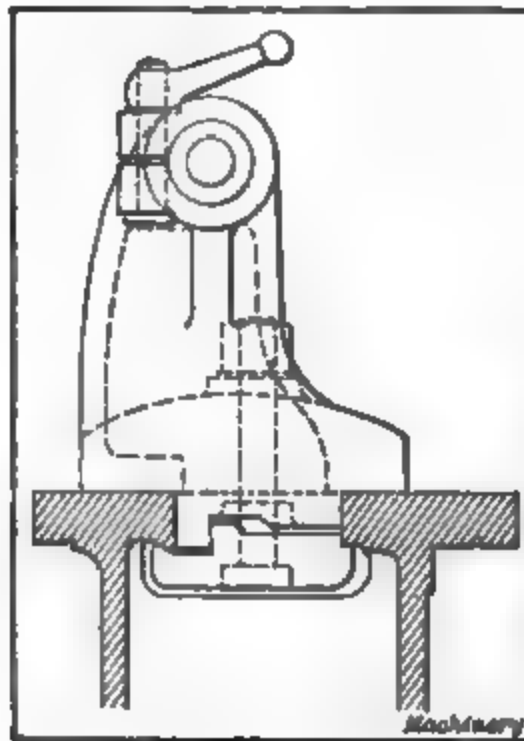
Lathe with Inverted Vee for Clamping, built by G. Birch & Co., Manchester, England
